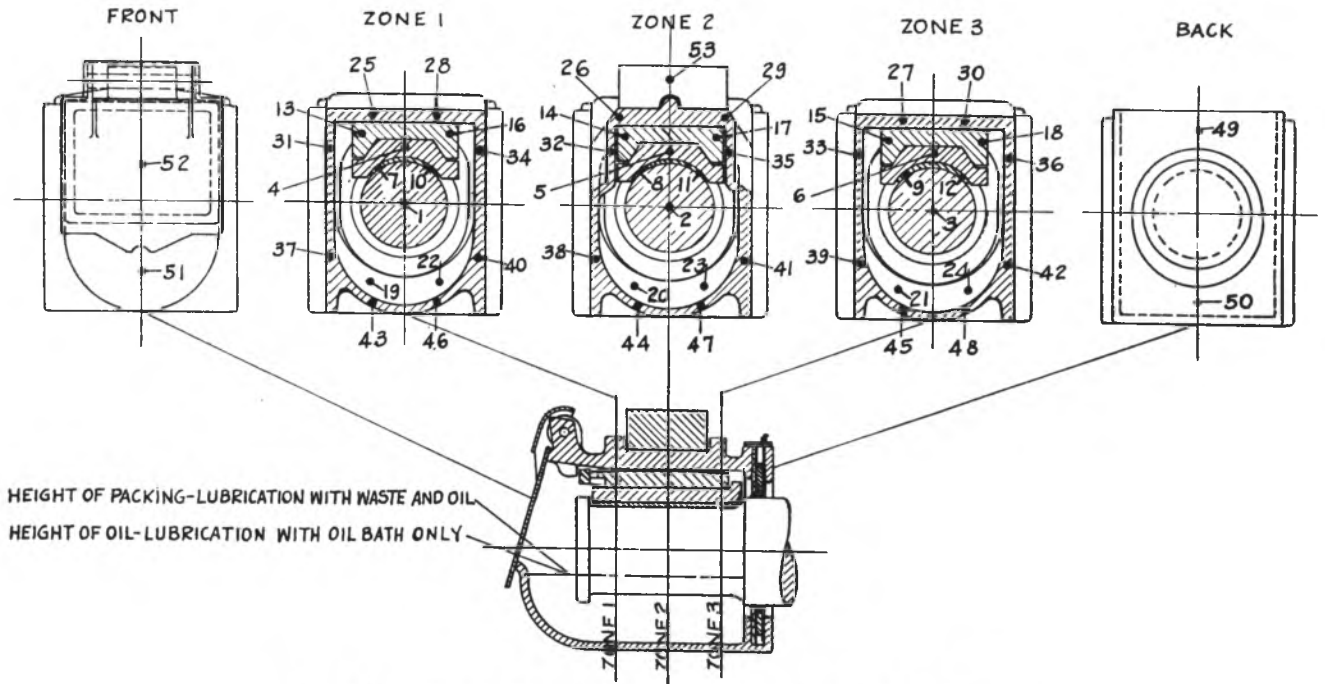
LOCATION OF THERMOCOUPLES IN STANDARD JOURNAL-BOX ASSEMBLY
